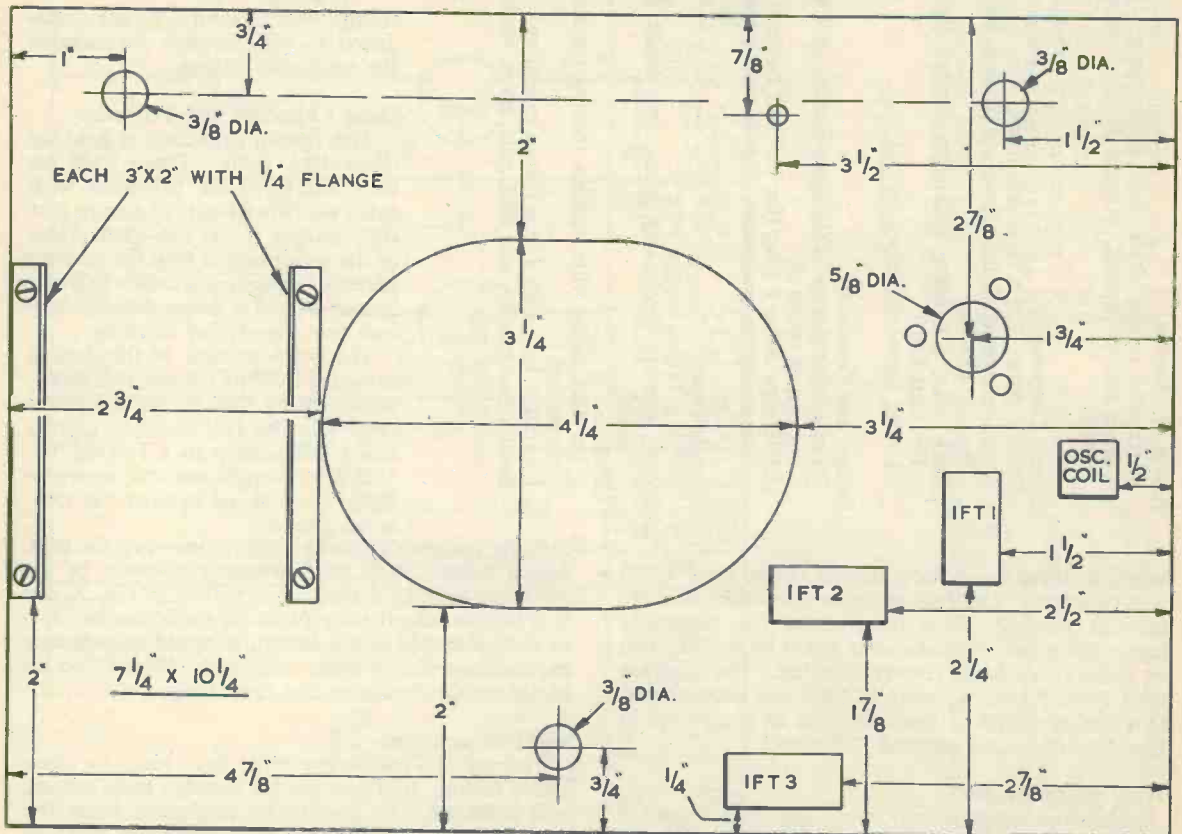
The principal holes required in the Paxolin board. As is explained in the text, the board may be secured, with spacing nuts, on the four speaker mounting bolts. The positioning of the four holes needed for such mounting can be taken from the loudspeaker employed
